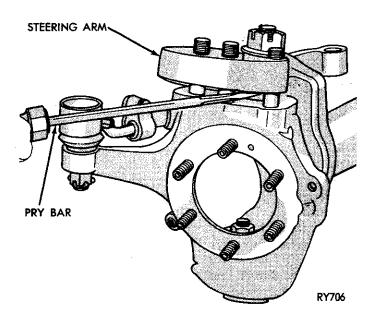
Steering Knuckle Arm Removal DRAG LINK REMOVAL/INSTALLATION
